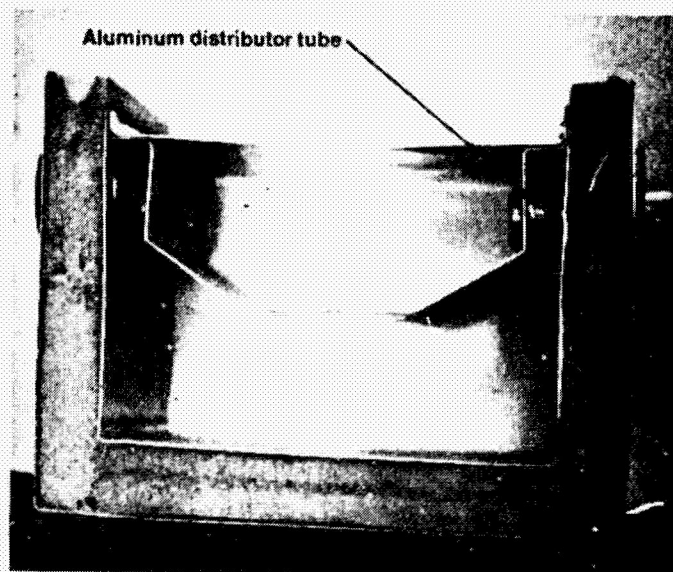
Aluminum Distributor Tube Threaded into Socket in Inner Duct.
